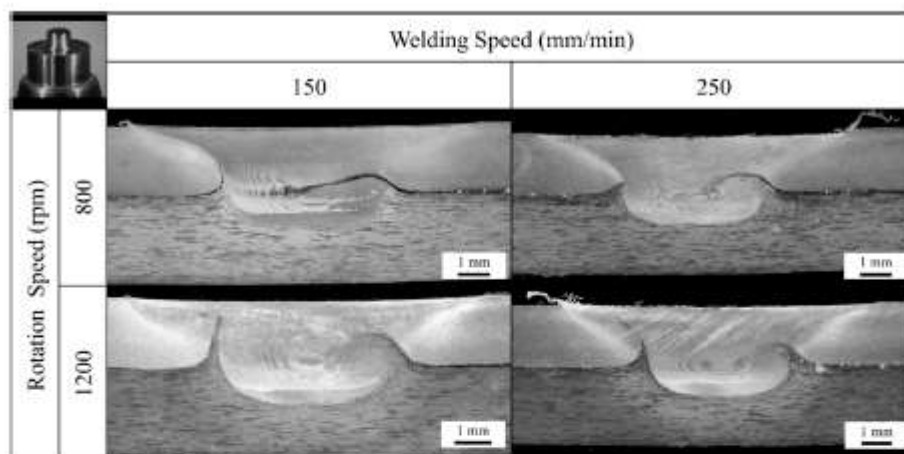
Transverse macro-sections of the friction stir welding (FSW) lap joints performed with the conventional threaded tool. The advancing side is located at the left of the image for all macro-sections. Tool translation movement was forward from the shown cross-section.
